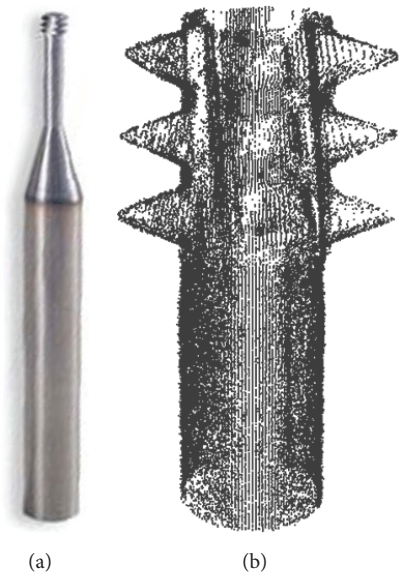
(a) Picture of a miniature solid carbide thread mill Vargus Vardex MilliPro and (b) corresponding reconstructed point cloud (59526 samples).
